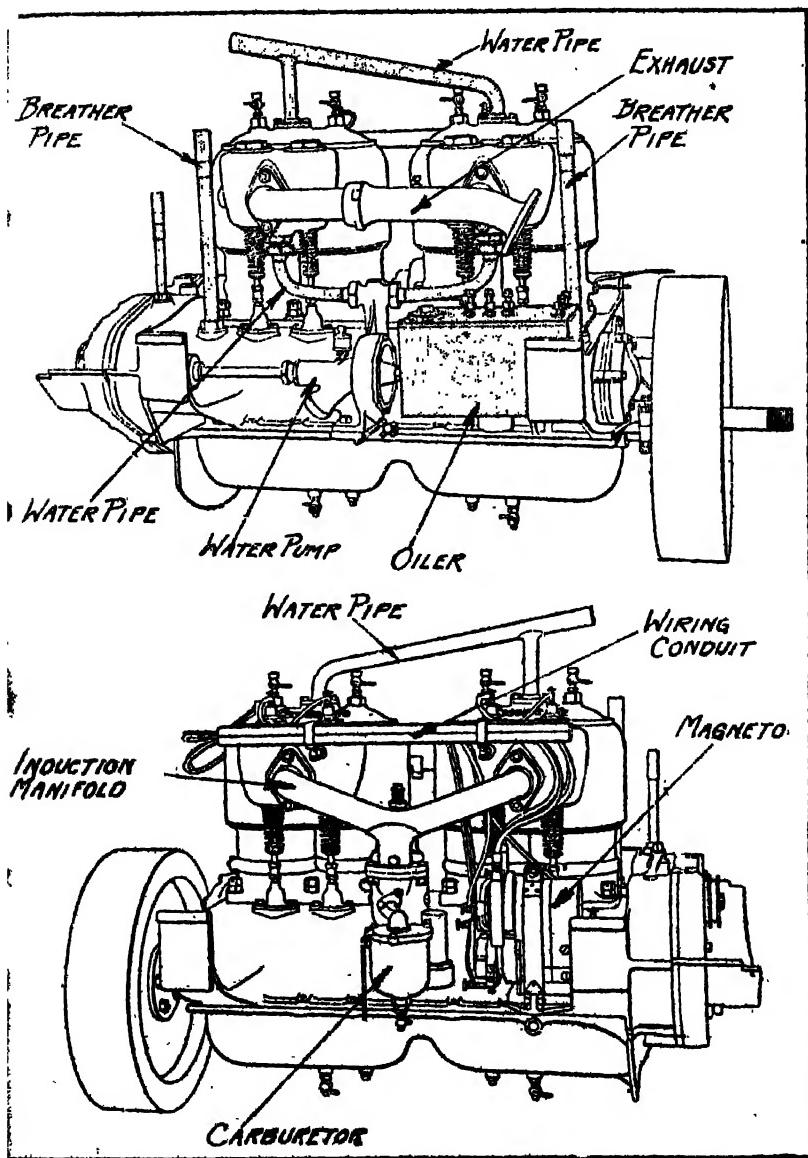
Exhaust and Intake Sides of Locomobile Four Cylinder Motor.
